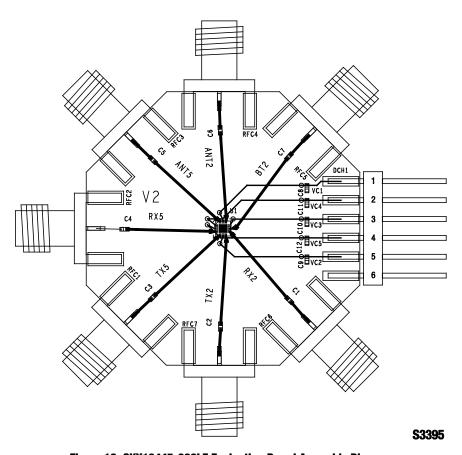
SKY13445-368LF Evaluation Board Assembly Diagram
